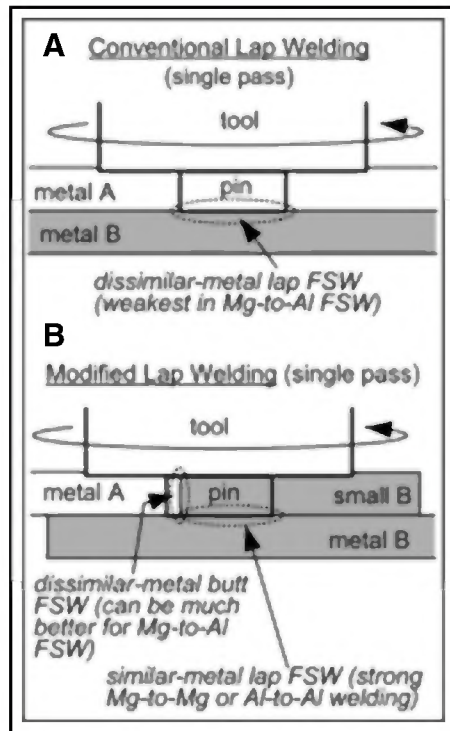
Single-pass FSW of metal A to metal B in a lap joint. A — Conventional lap joint; B — modified lap joint (by butt joint welding a small piece of metal B to metal A with pin penetration into bottom metal B).
